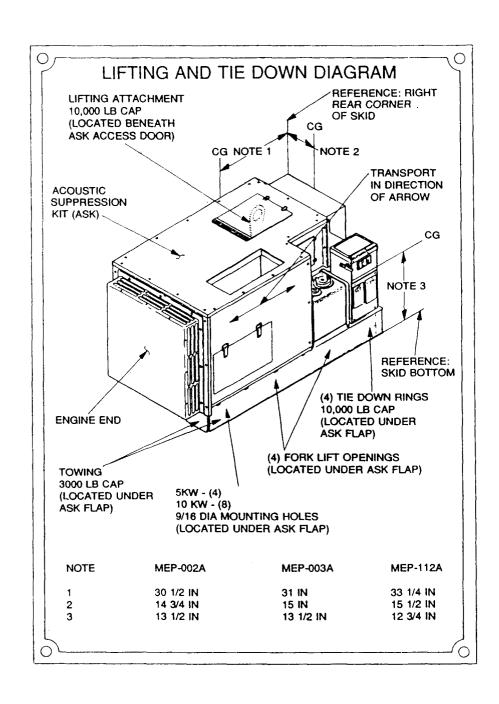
Instruction and Rating Plates (Sheet 4)
